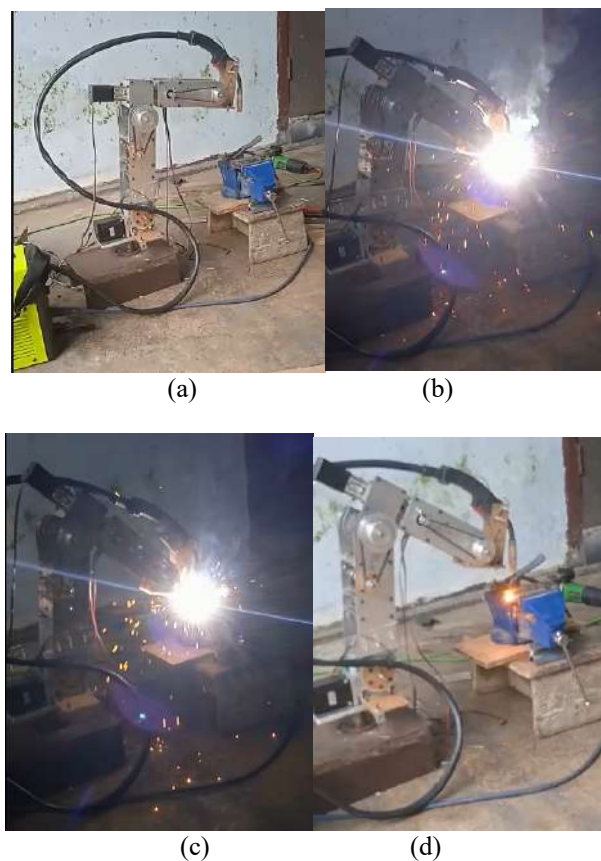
Straight Welding Task Using Robotic Arm (a) Home Position, (b) Start Welding Process, (c) Final Welding process, (d) Back to Home Position.
